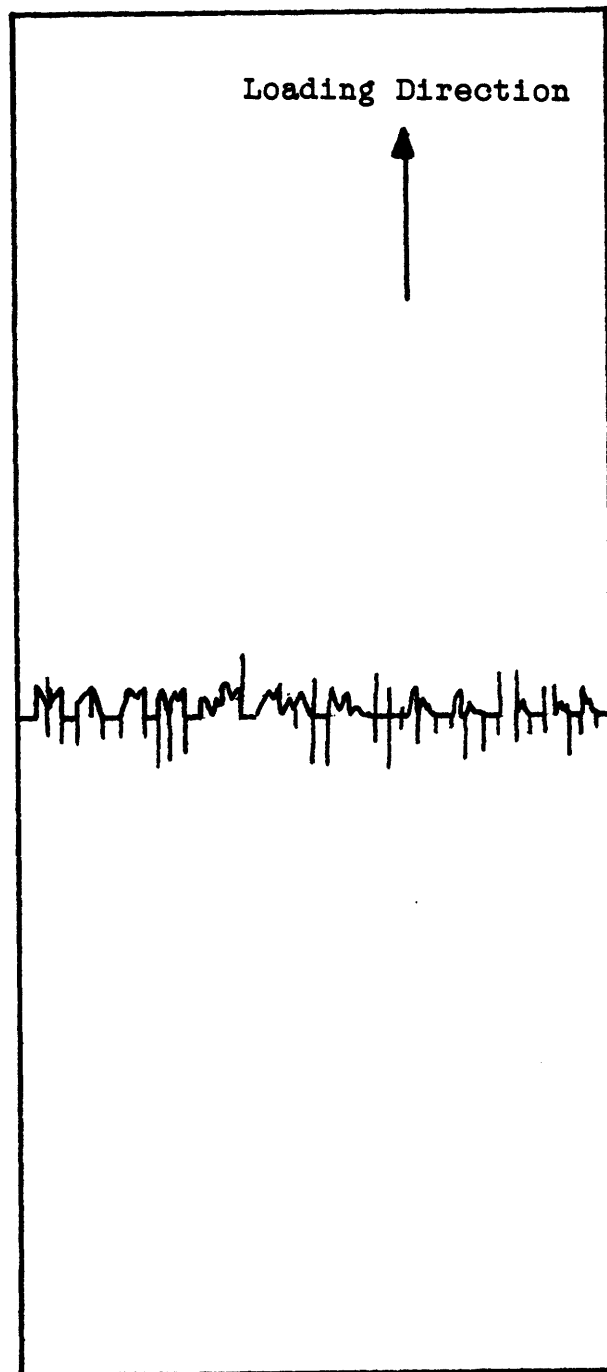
Sketch of Undamaged Plate Specimen Failure
